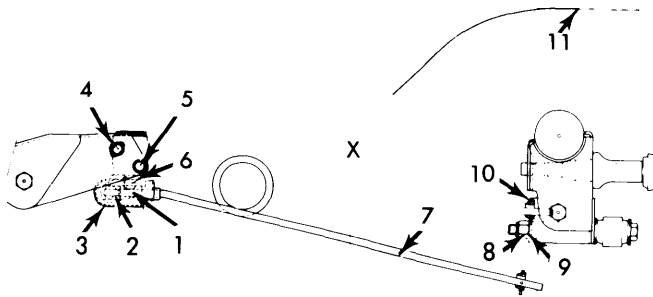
Brake Pressure Regulator Measurement and Adjustment Points (131 Models)
